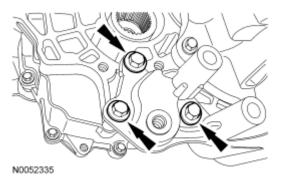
Locating Roll Restrictor-To-Subframe Bolt Courtesy of FORD MOTOR CO.
